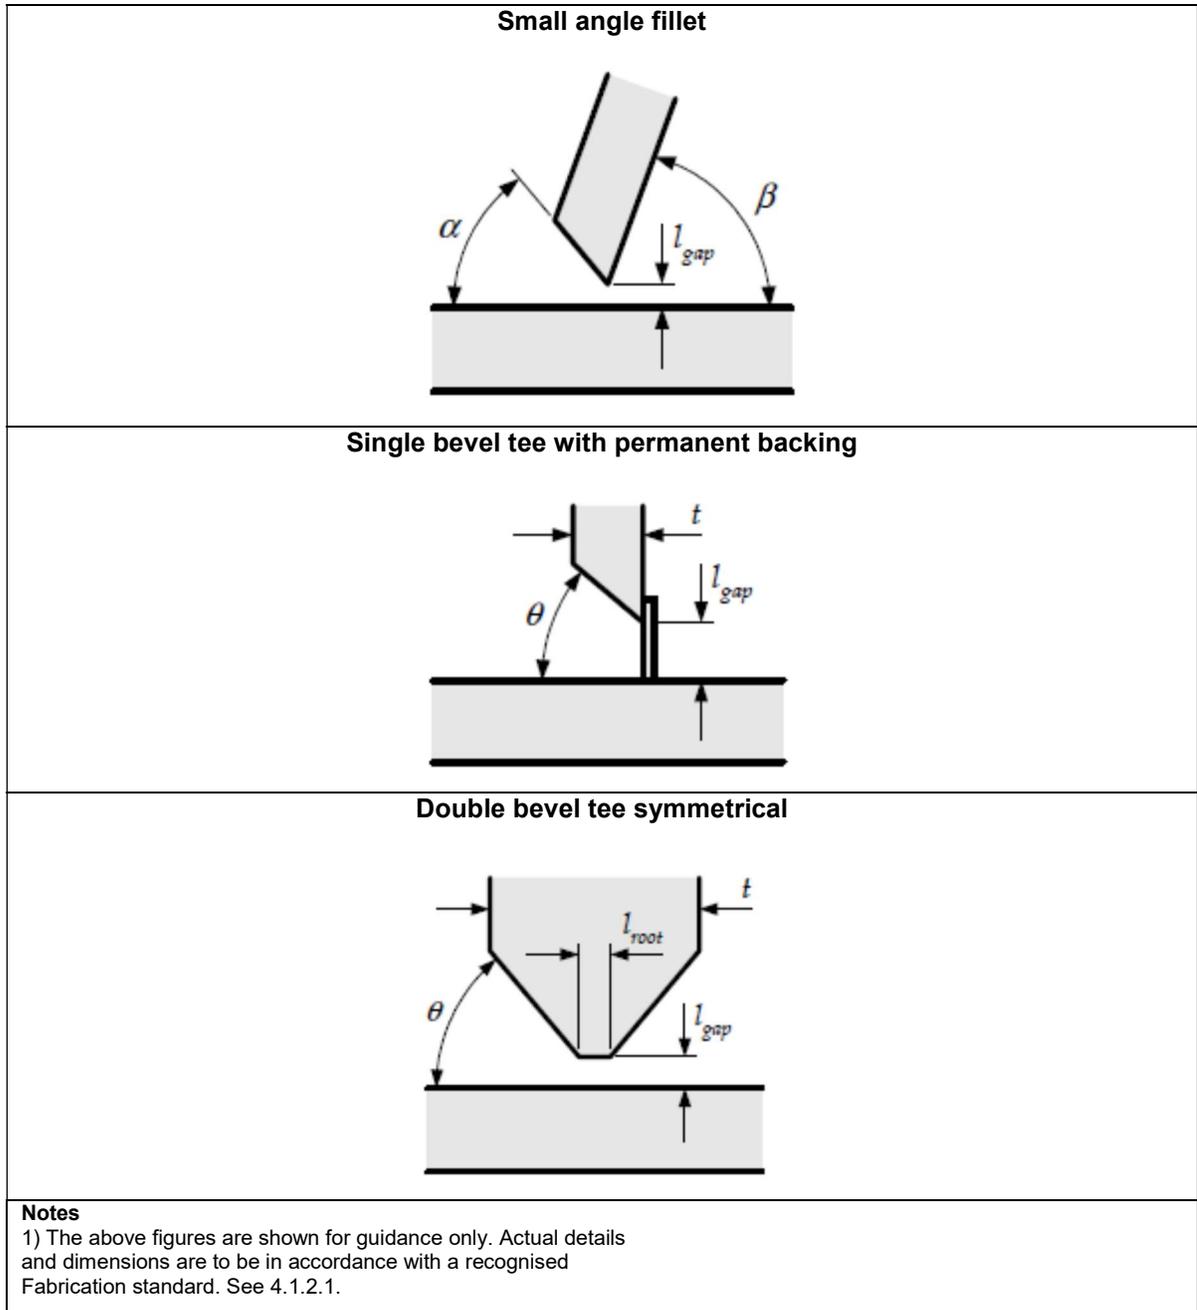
Other Typical Tee and Cross Joint Welds
